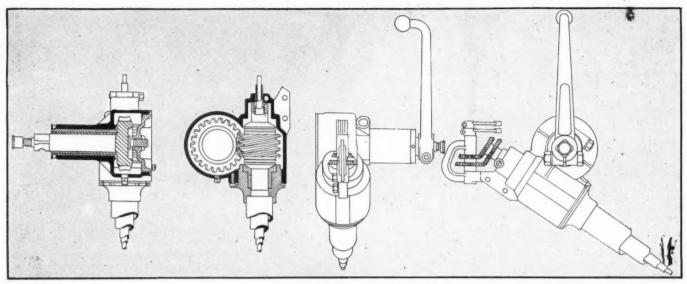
Mechanical details of the new steering gear made by the Warner Manufacturing Company for heavy touring cars and light
